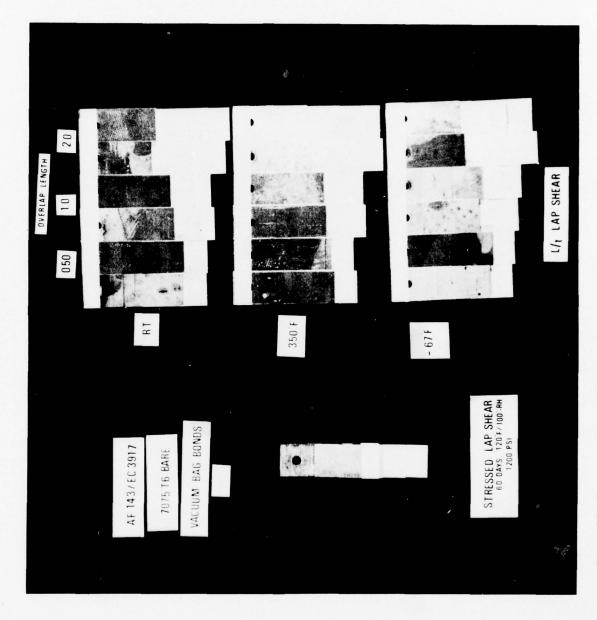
Specimen Failure Surfaces—AF 143, Non-Tank Anodized, Vacuum Bag Bonds
